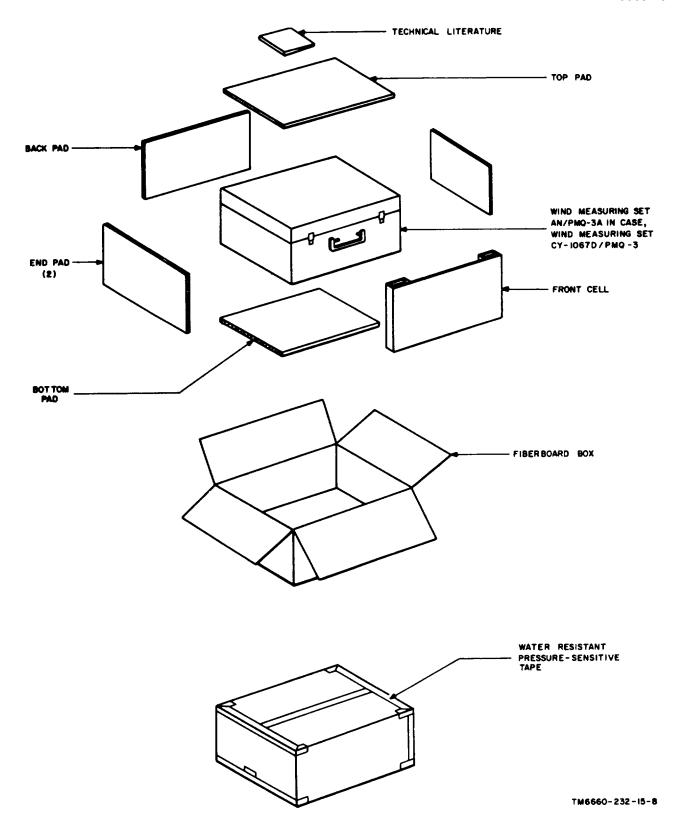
Packing diagram for Carrying Case CY-1067D/PMQ-3, exploded view.
